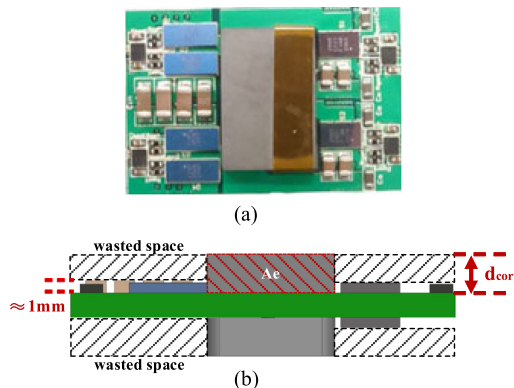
Conventional planar PCB 48–12 V DCX [3]. (a) Top view of the prototype. (b) Side view diagram.
